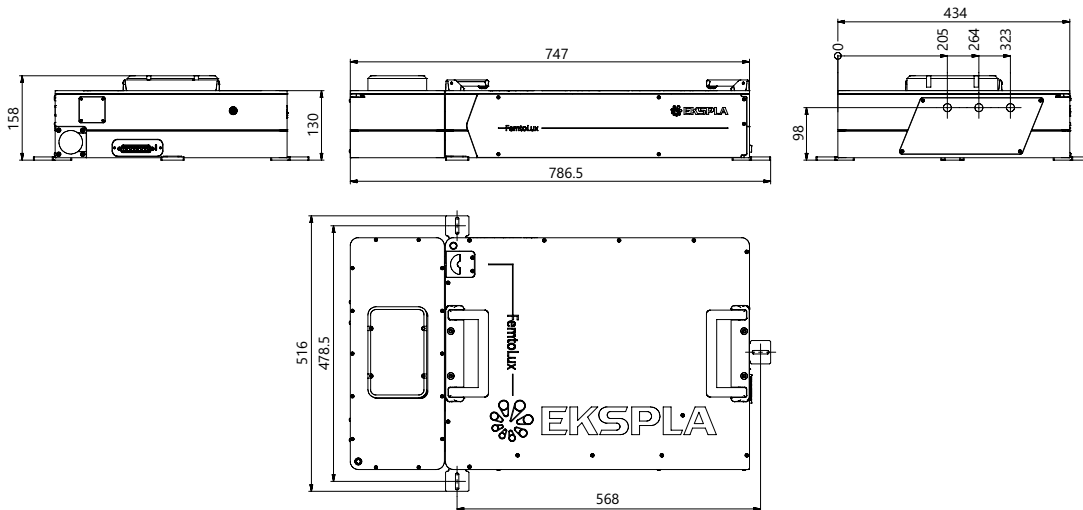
FemtoLux with harmonics module. Laser head outline drawing
